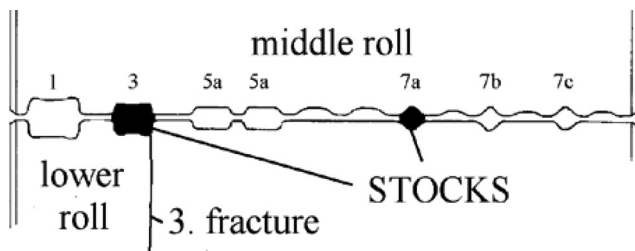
Fracture surfaces of the 1<sup>st</sup> broken roll and the position of the stocks at the time of the fracture
